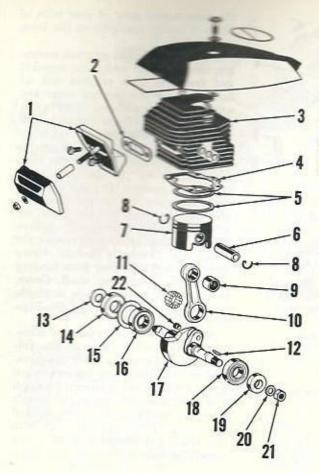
Exploded view of cylinder block, piston, rod and crankshaft assemblies used in engines of models 340, 945, 1630, 1631, 1644, and 1645. Plug (22) can only be purchased with crankshaft (17) as an assembly to retain engine balance.
